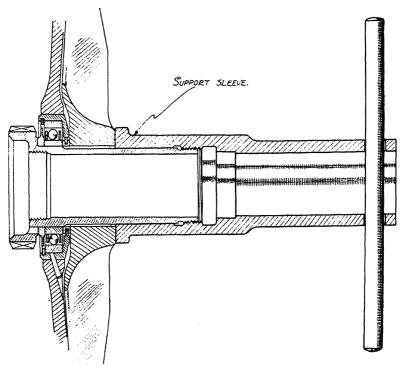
Showing application of support sleeve for checking impellor clearances.
